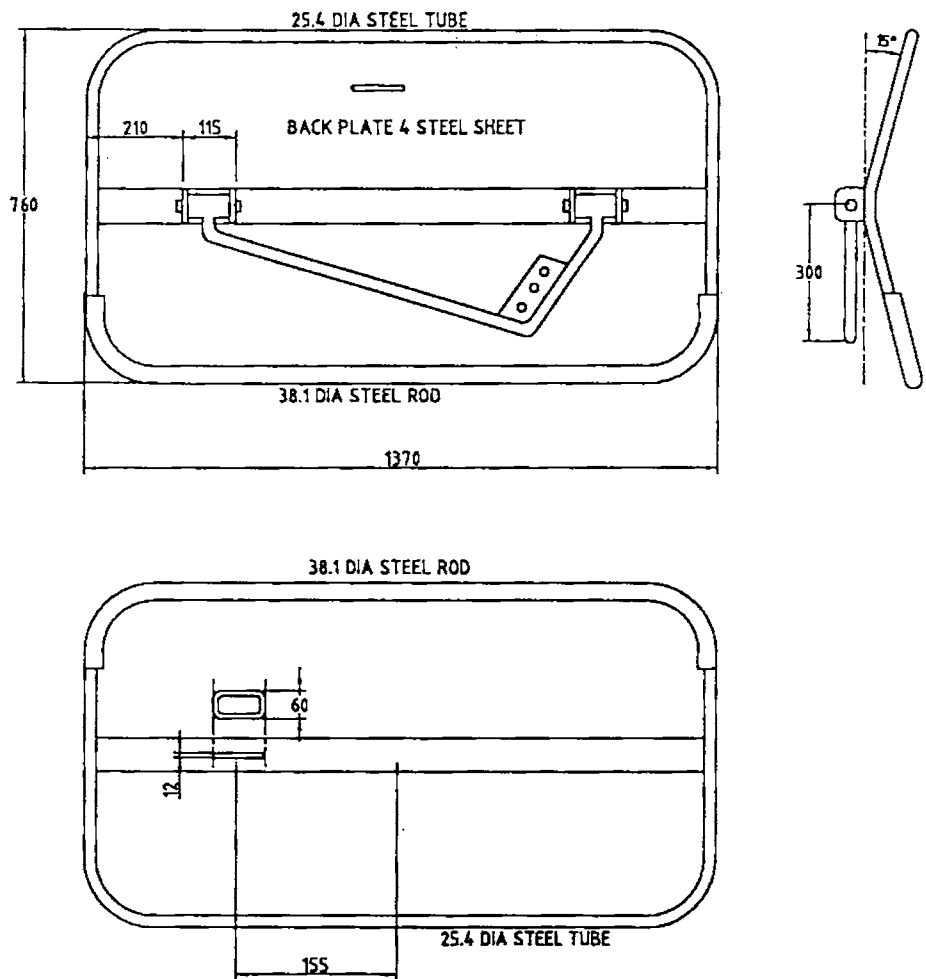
Design details of rectangular V-form steel otter board (1370x760 mm; 65 kg.)
